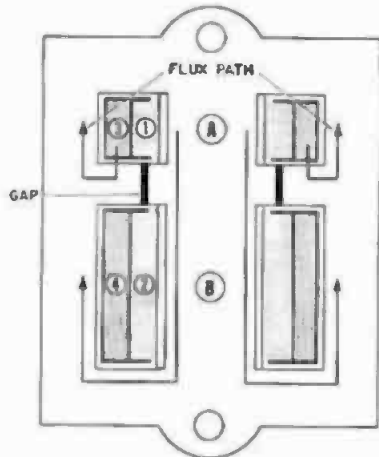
C. Cross-sectional view of the core and coil construction of a Solo Electric Co. constant-voltage transformer.
